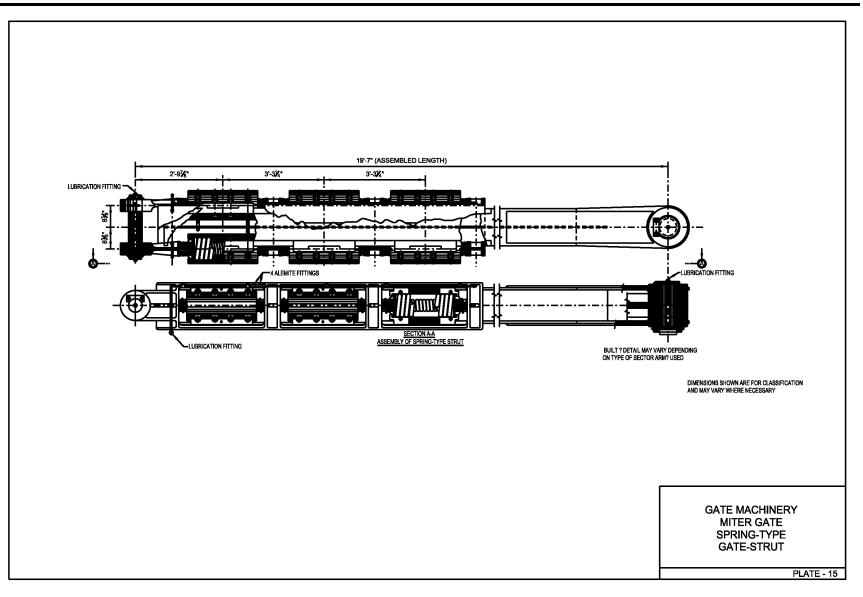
Plate 15: Gate machinery miter gate, spring-type gate strut
